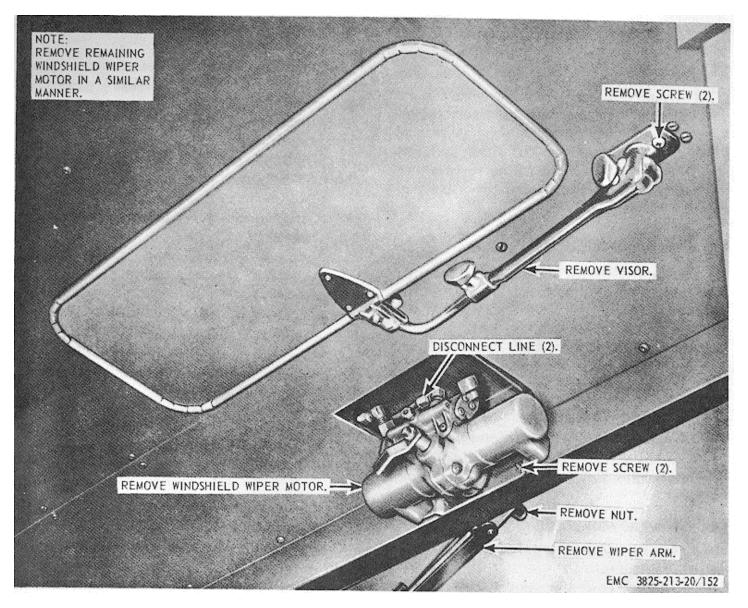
Windshield wiper motor, arms, and visor, removal and installation.
